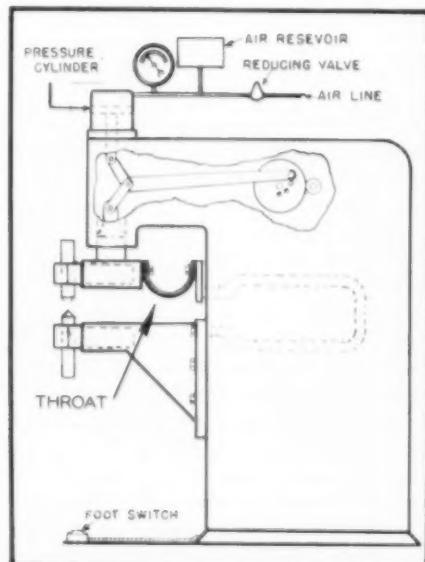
Outline of a typical spot welding press, showing contour of the secondary electrical circuit as well as welder throat.
